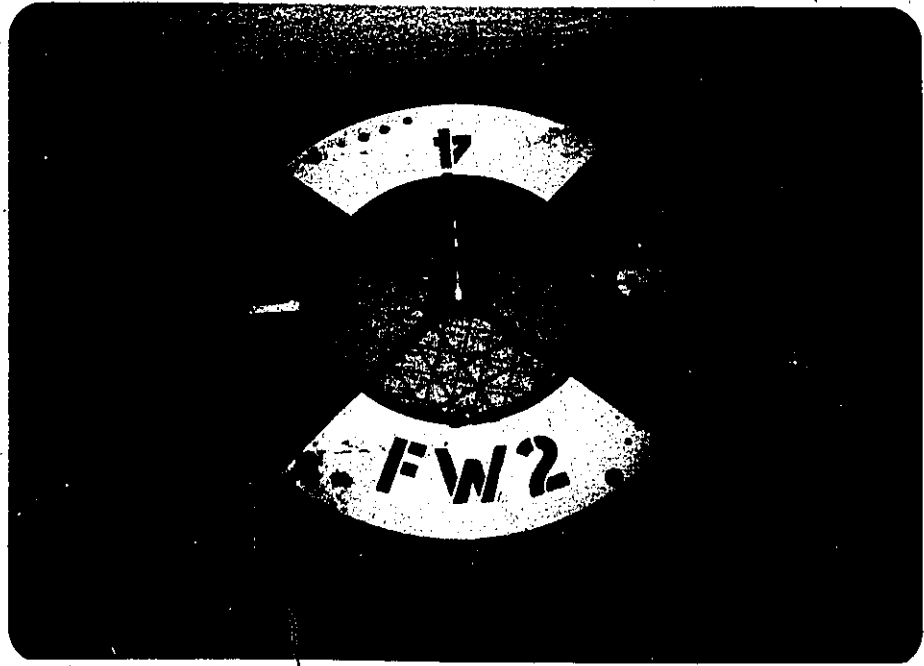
Flywheel design number 2.. E/XAS carbon outer ring, S2-glass laminate hub and steel attachment.
